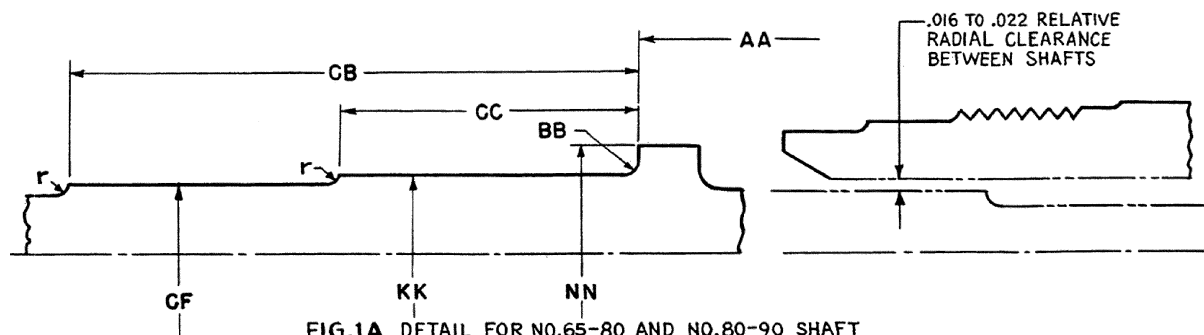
A DETAIL FOR NO.65-80 AND NO.80-90 SHAFT
